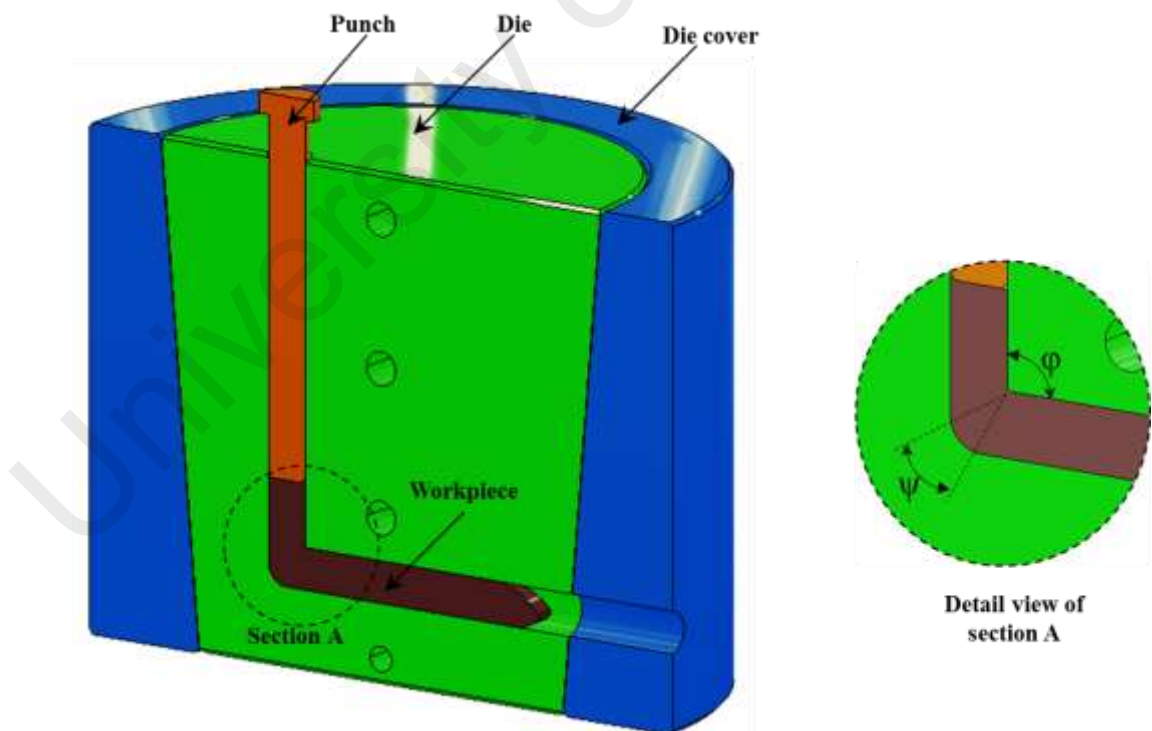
Pictorial drawing of equal channel angular extrusion (ECAE)
